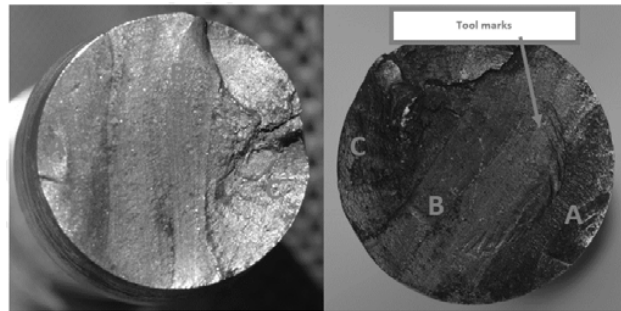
View of the fatigue fracture surface of the PP axis - Model A3300
